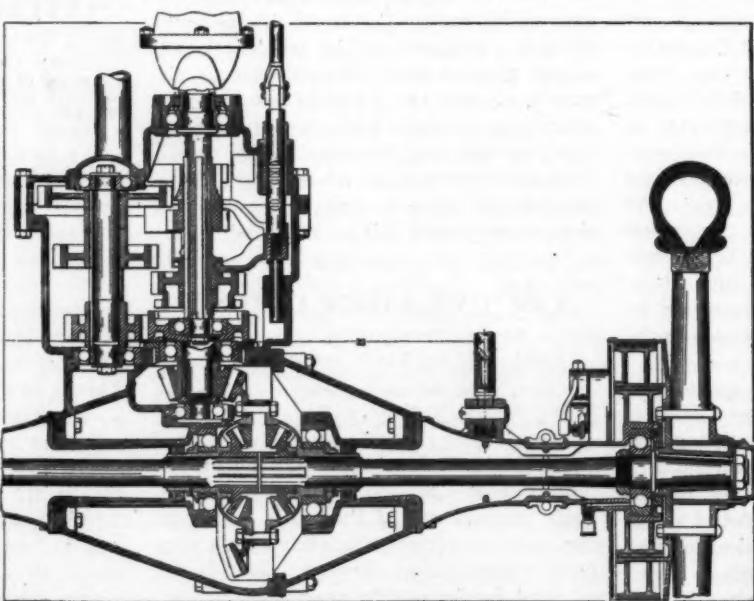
Live rear axle with attached transmission, sectioned to show annular ball bearings, floating shafts, double brake drum and general details
